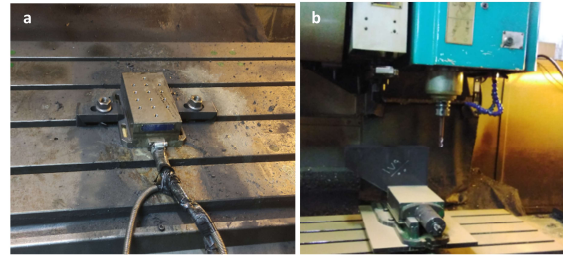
Used equipment: (a) dynamometer sensor, and (b) method of closing the piece.
